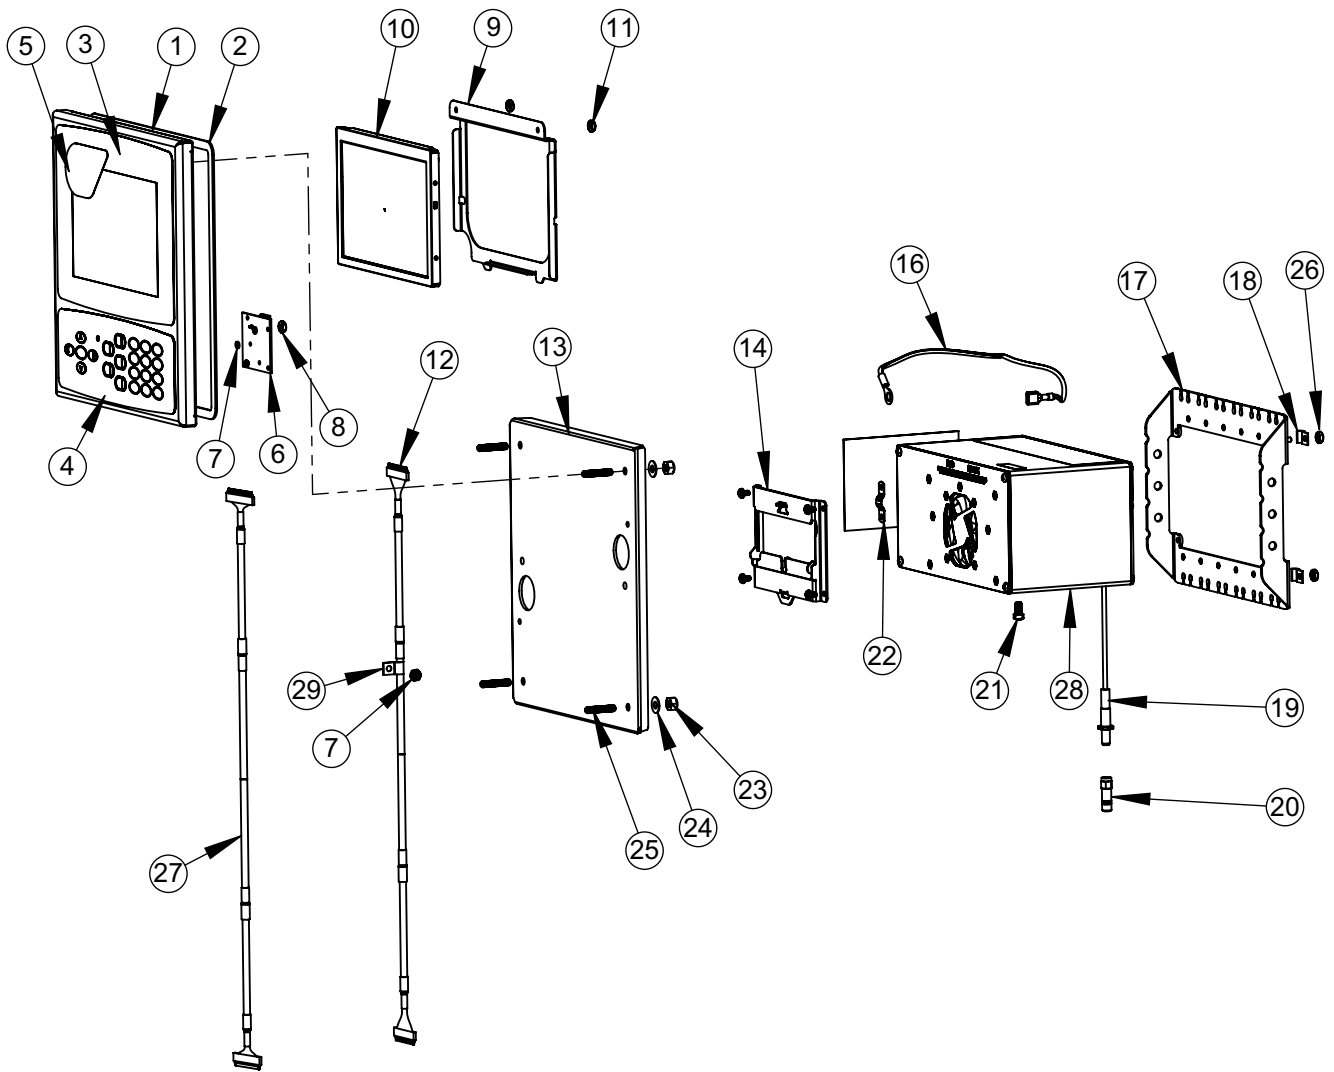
7"-Inch Panel Mount Repair Parts
